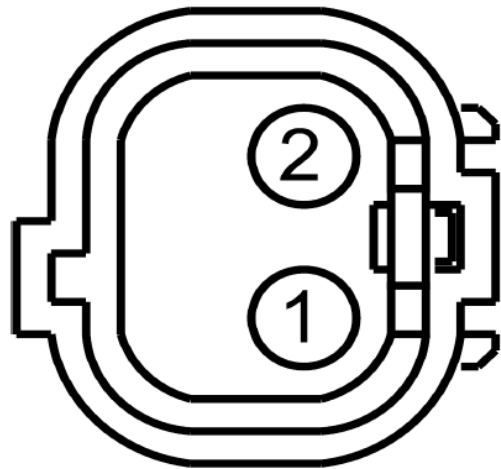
Variable Camshaft Timing Valve Connector End View (C1542)
